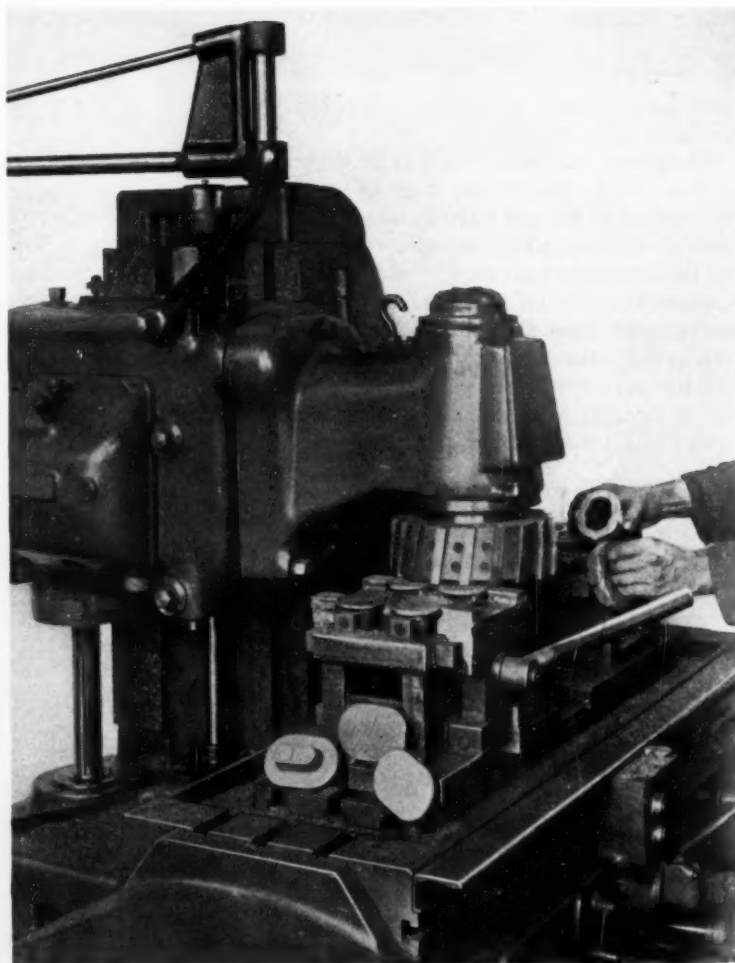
MULTIPLE RECIPROCATING MILLING USING TUNGSTEN CARBIDE CUTTERS
